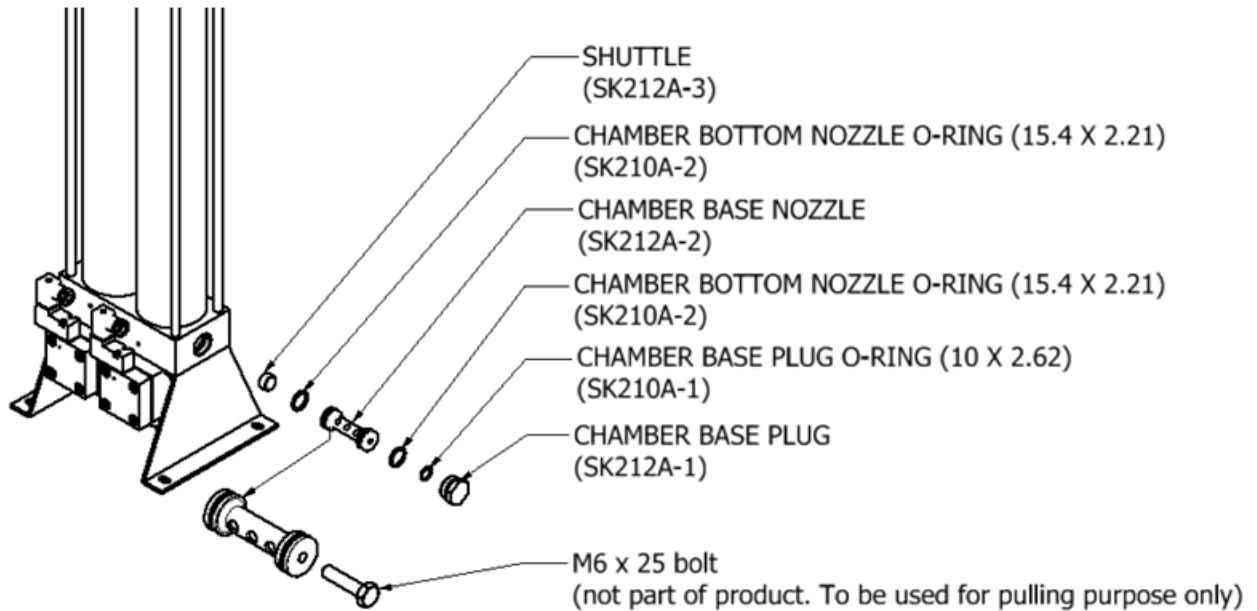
Exploded view of bottom shuttle of Dryspell Plus 10
